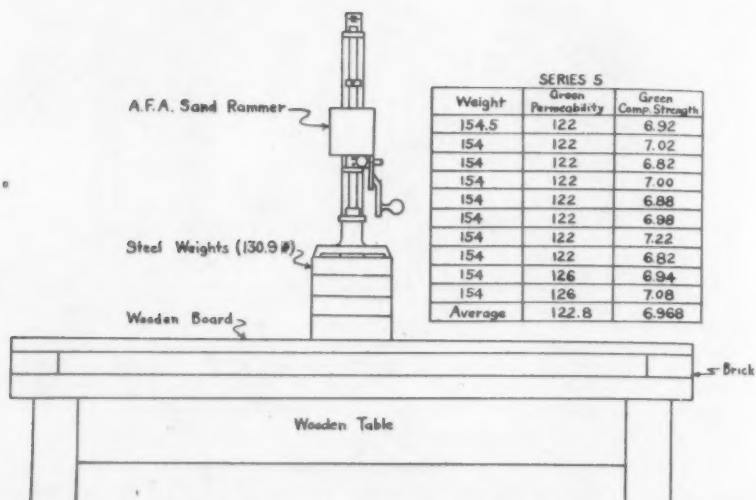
A.F.A. SAND RAMMER MOUNTED ON WOODEN BEAM WITH 130.9-LB. REACTION BLOCK.
